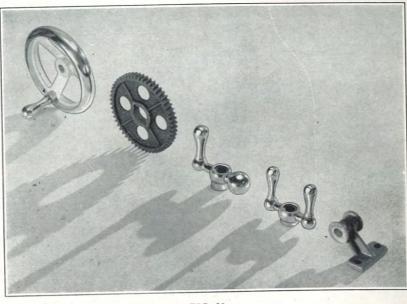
Some of the parts on the Atlas Lathe which are made of the alloy "Zamak."
